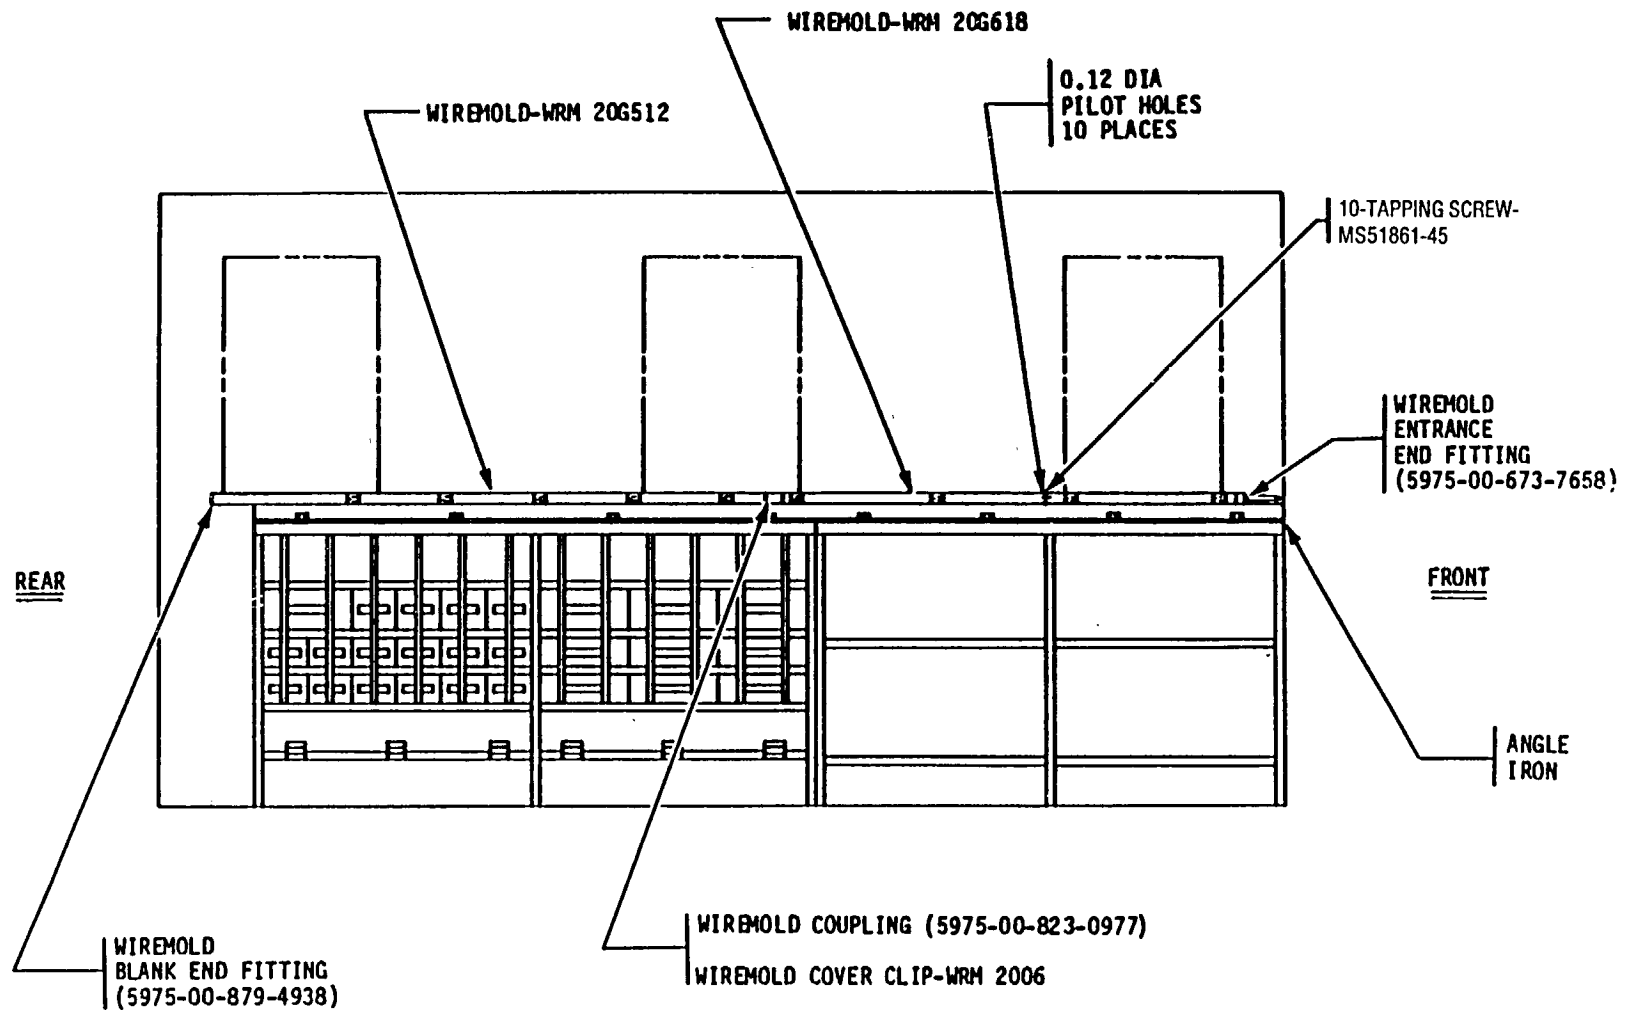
Wiremold Installation, Left Side Wall, M109A3.
